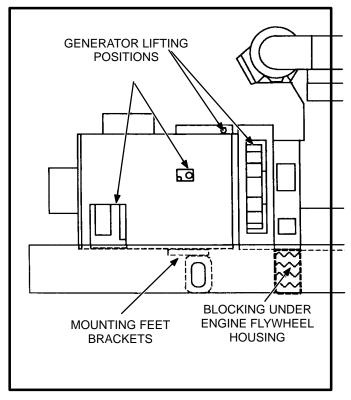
GENERATOR LIFTING POSITIONS
